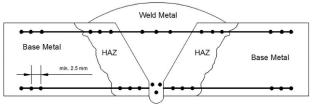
Schematic hardness measurement of welded material according to EN 9015-1 standard [16]
